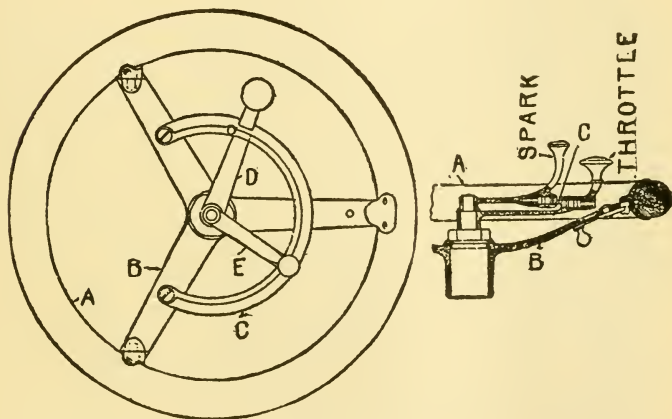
Steering wheel and attachments. A is the wheel rim; B, a spoke or arm of the three arm spider; C, sector for sliding arms, D and E; D, throttling arm and handle; E, spark regulating handle. The throttle is opened by moving the handle clockwise around the sector; the spark is advanced by moving its handle in the same direction.
